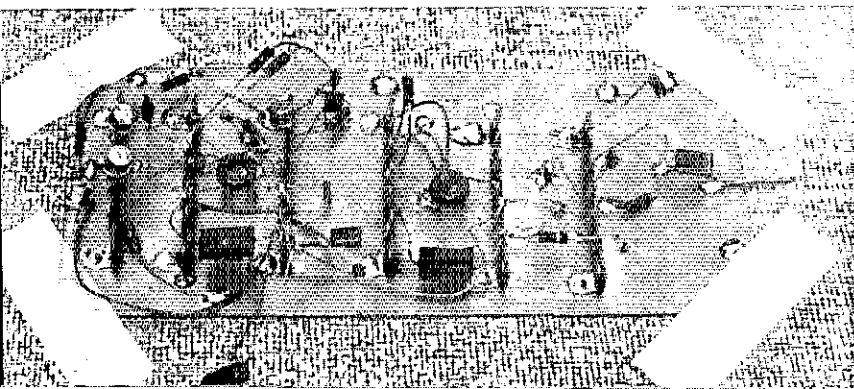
One of the breadboard circuits which is assembled on a scrap piece of pc board using lug strips as connection points.
